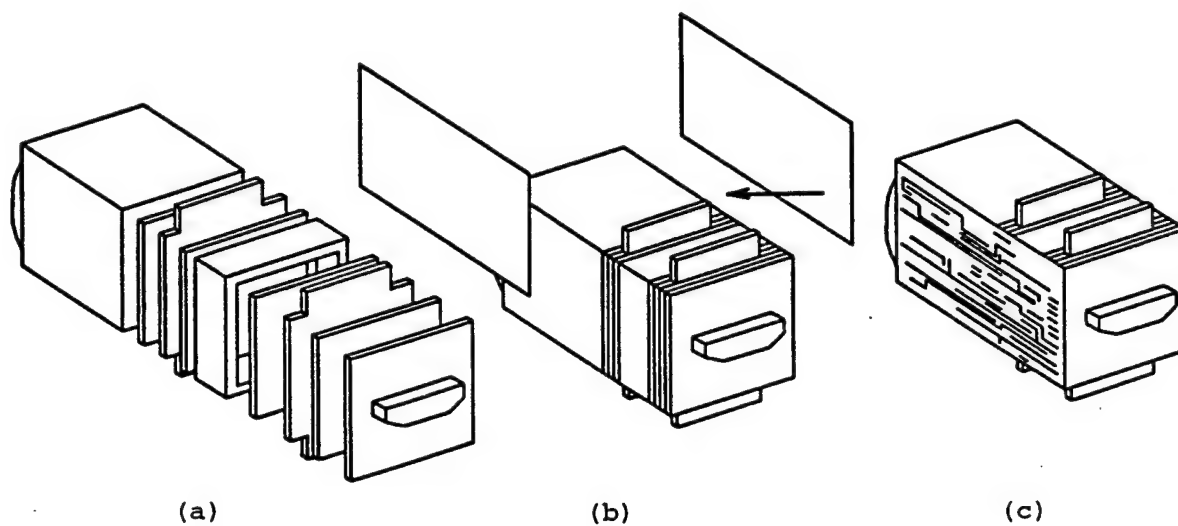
Concept of a monolithic packaging process. (a) Exploded view, depicting HDI modules, imaging sensor front end, thermal plates, electrical spacer layers, power supply, and connector. (b) Assembled unit, before electrical overlays are formed. (c) Completed assembly.
